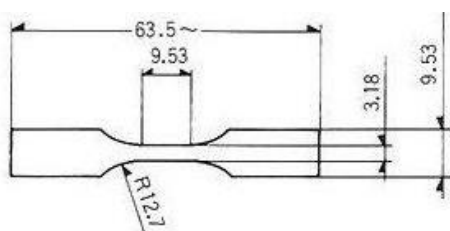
Dimension of dumbbell shaped sample for tensile testing of cryogel samples.
